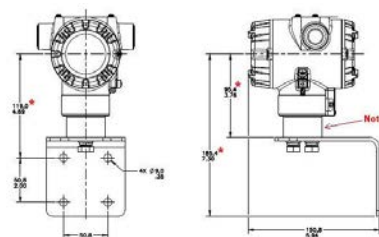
STT with adapter housing - Horizontal Wall Mounting
